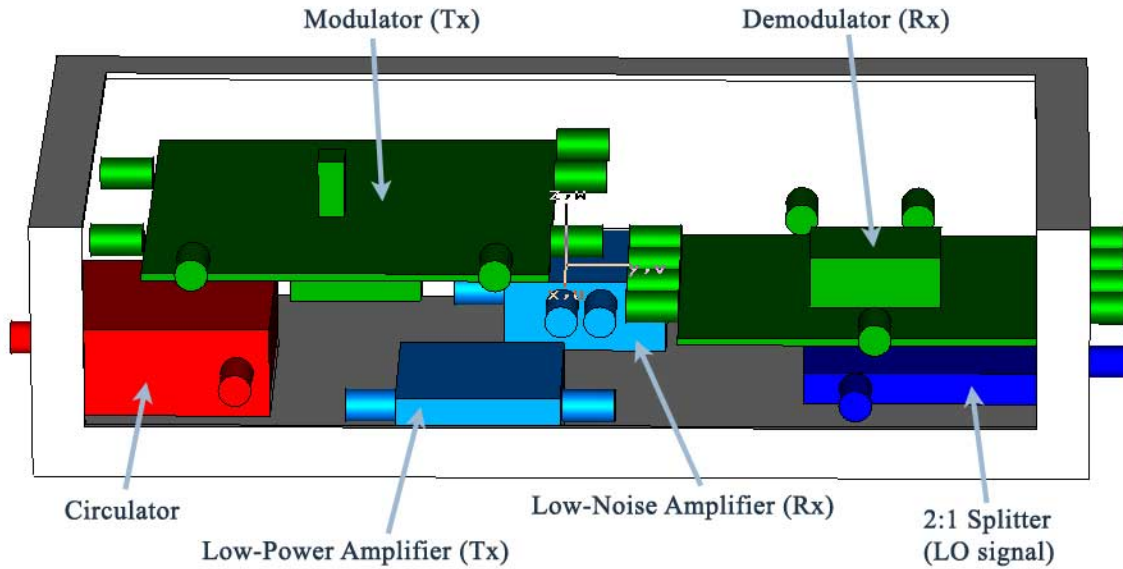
CAD model of a demonstration T/R module mechanical layout inside a 2 x 4 x 8 [in<sup>3</sup>] enclosure.
